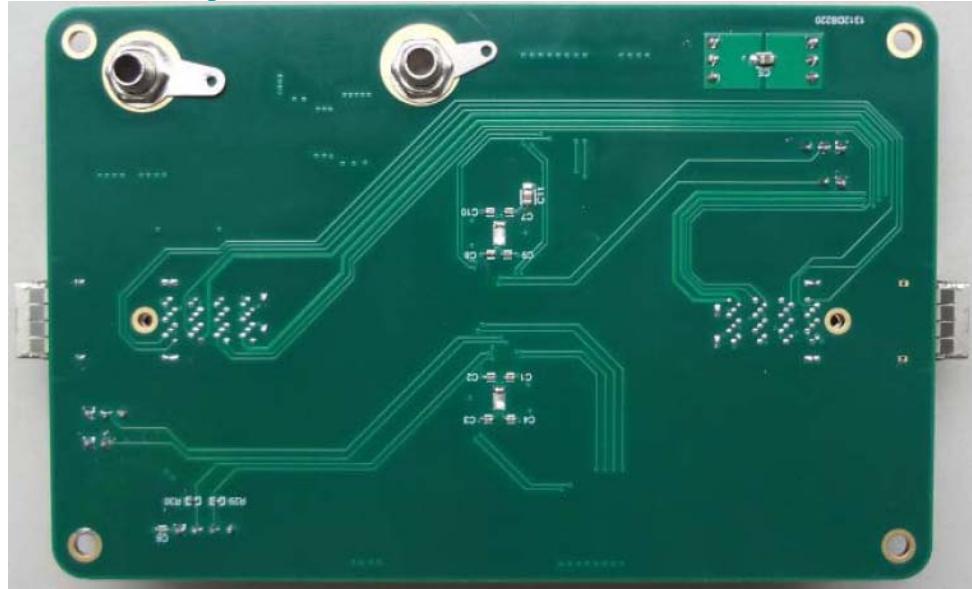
Bottom view of PI3EQX1204-BZHE miniSAS EVB
